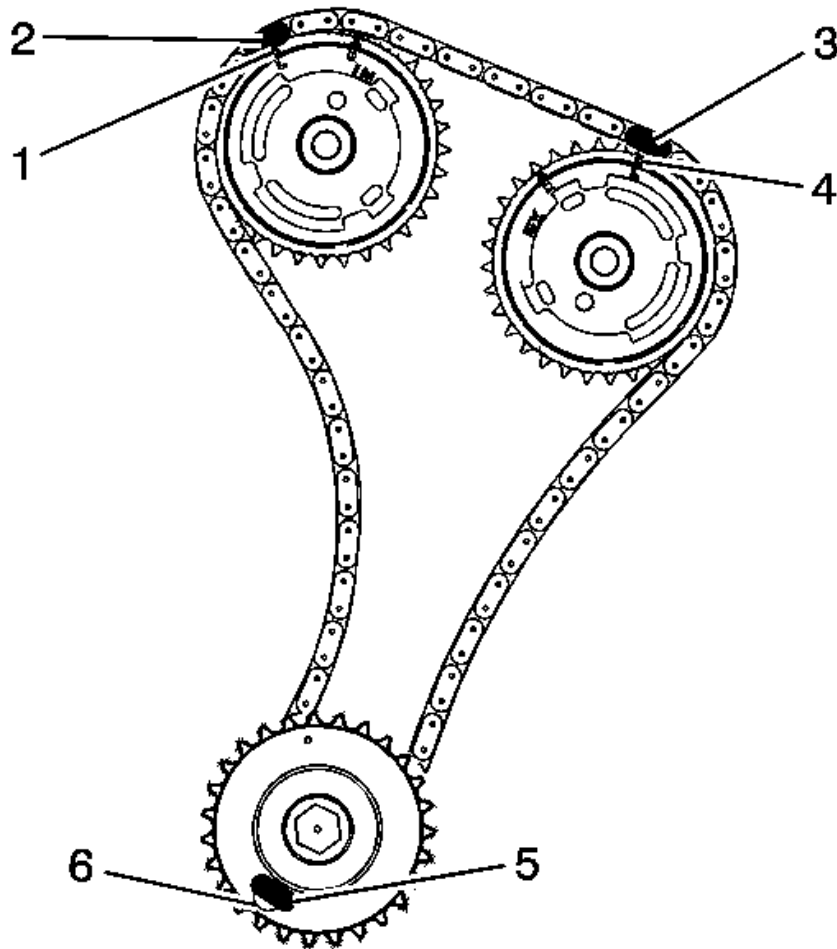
Locating Left Secondary Camshaft Drive Chain Timing Marks
